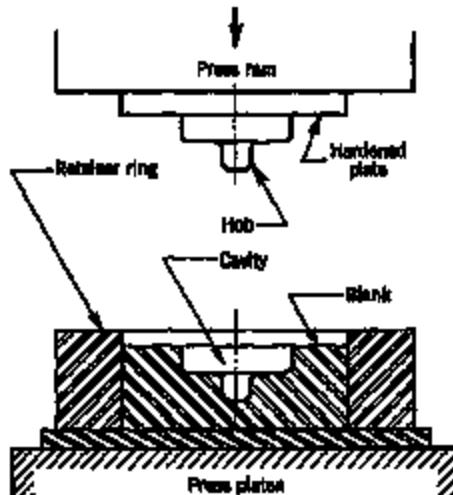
Die hob producing a mold cavity by pressing into soft steel.
